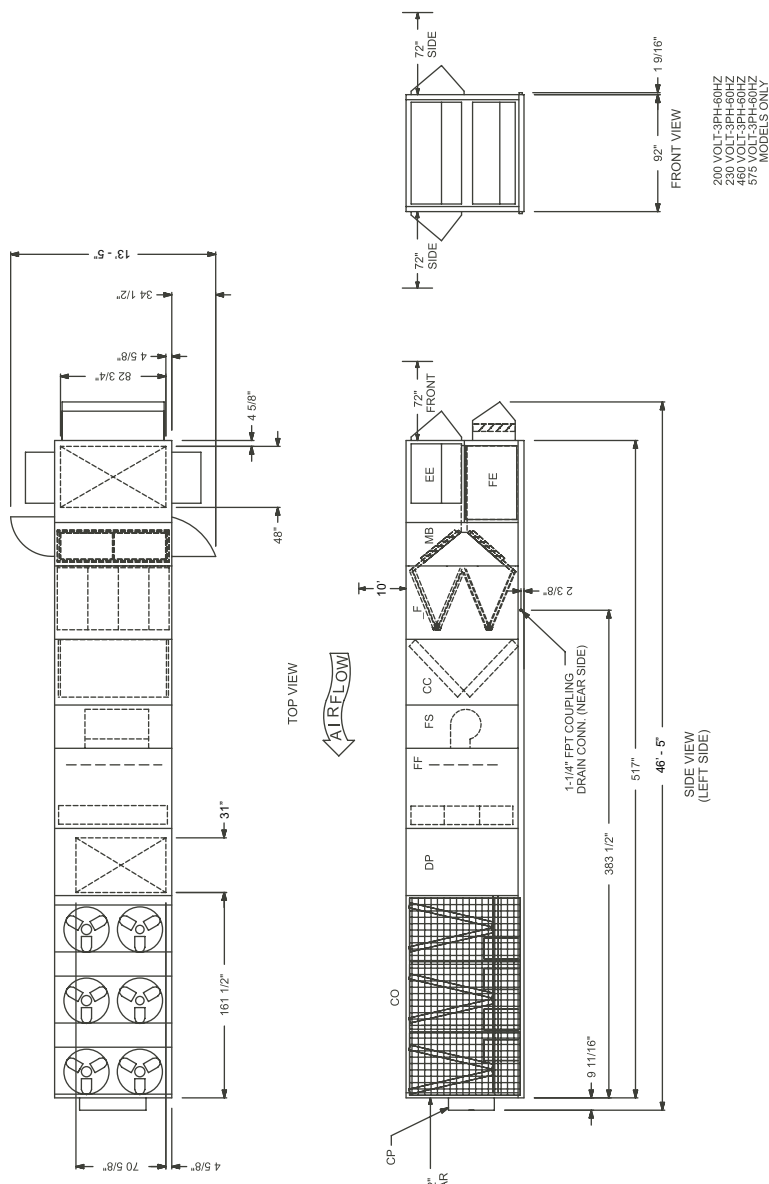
GENERAL ARRANGEMENT DRAWING
